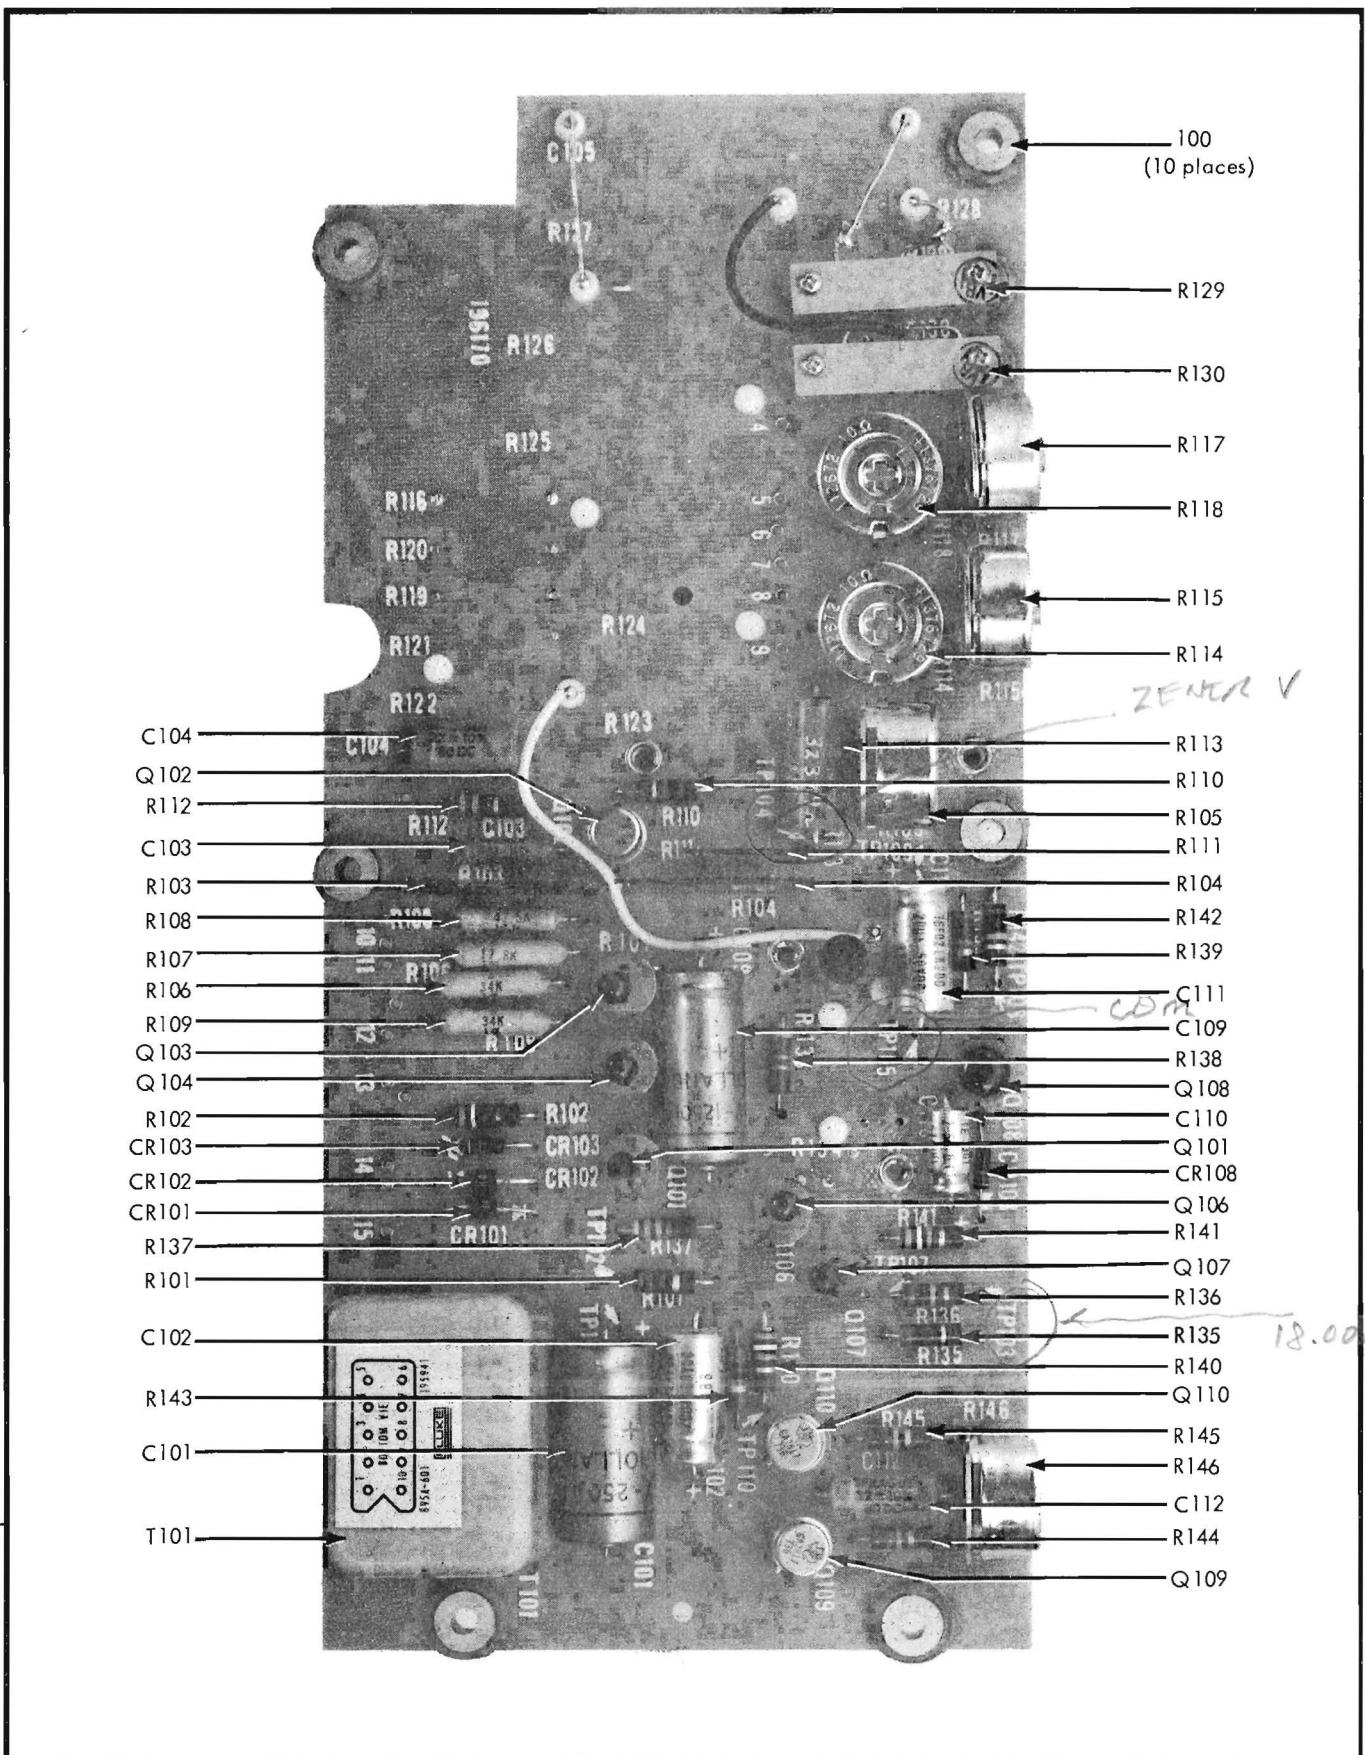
REFERENCE SUPPLY BOARD ASSEMBLY (Sheet 2 of 2)
